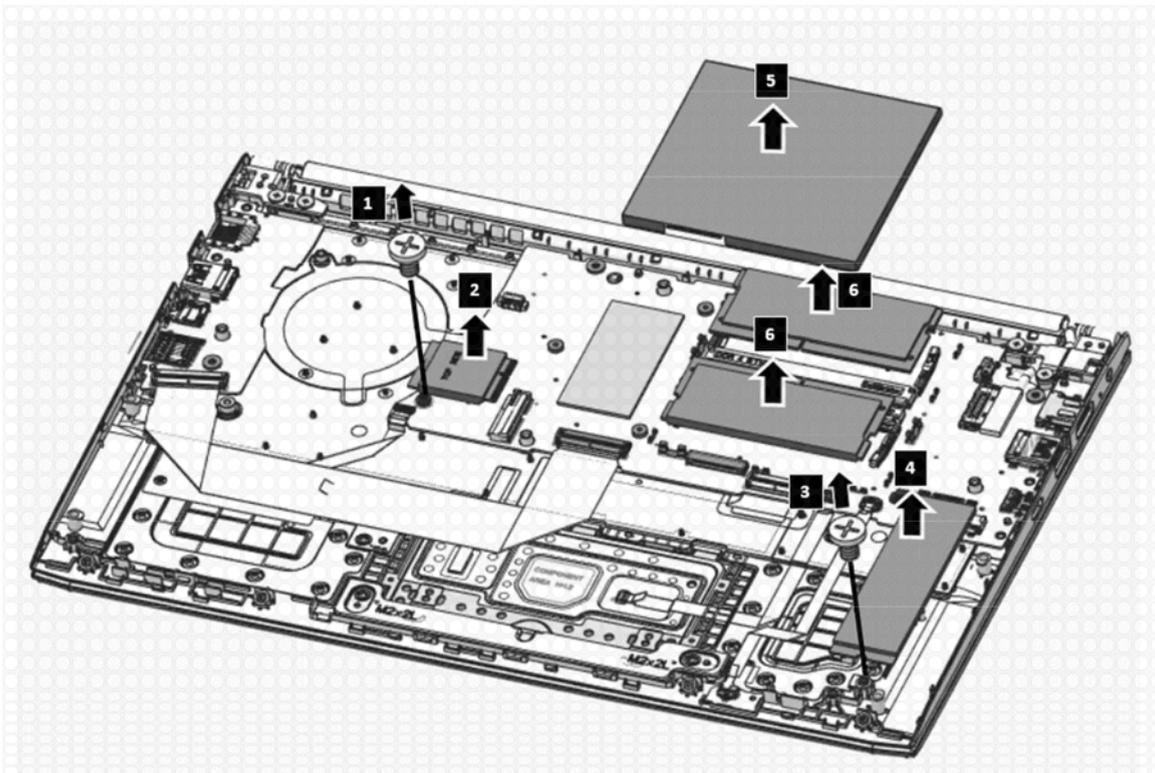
Removing the SSD Card/WLAN Card/DIMM
